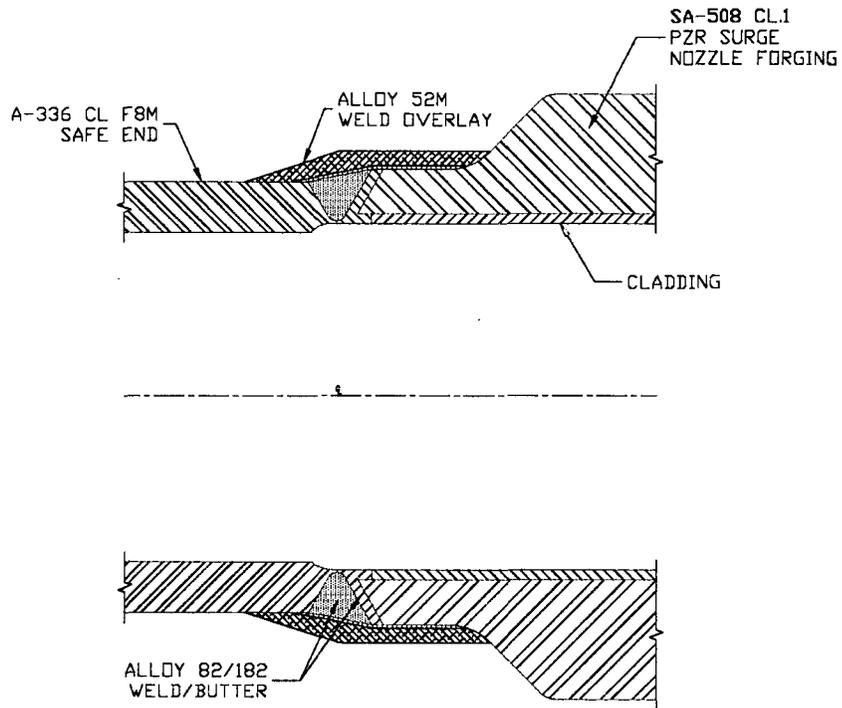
Pressurizer Surge Nozzle Weld Overlay
